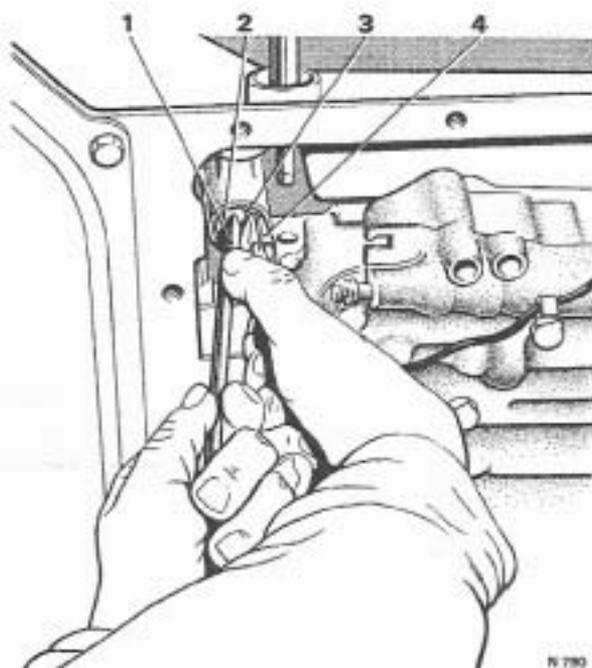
REMOVING THE PRESSURE REGULATOR VALVE
